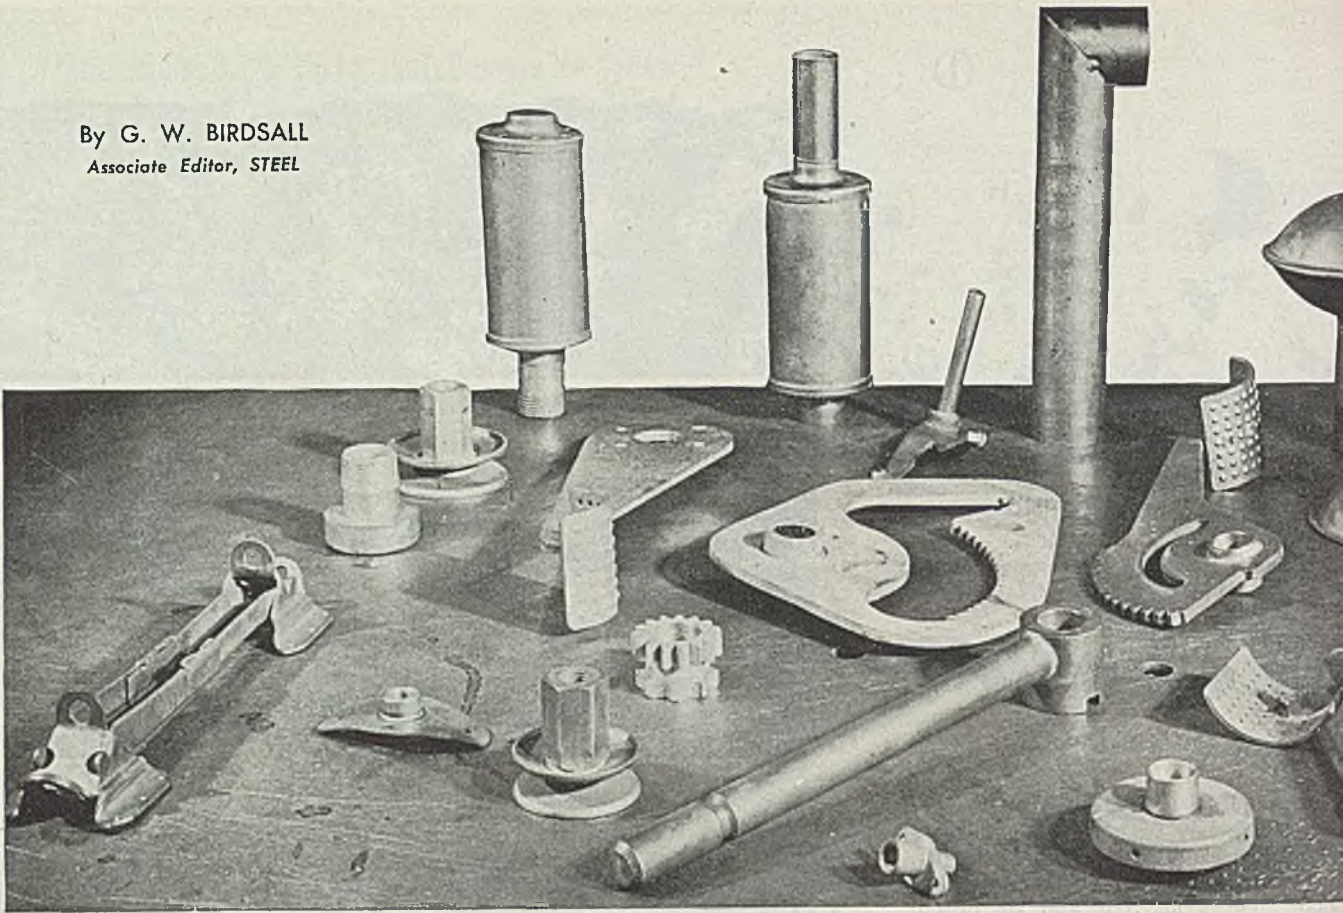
Parts copper brazed at Briggs & Stratton include several types of mufflers (seen at rear and made of sheet metal) as well as heavy stampings for pedals and sectors; also assemblies of screw machine parts made from bar stock, such as the crank in center foreground!
